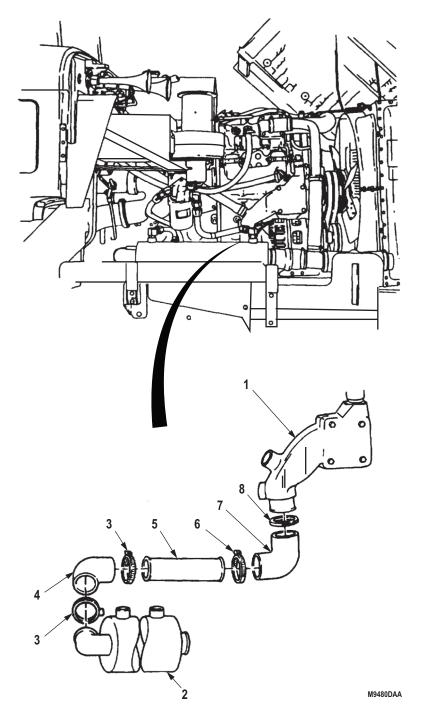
Transmission Oil Cooler Hoses and Tube Removal.
